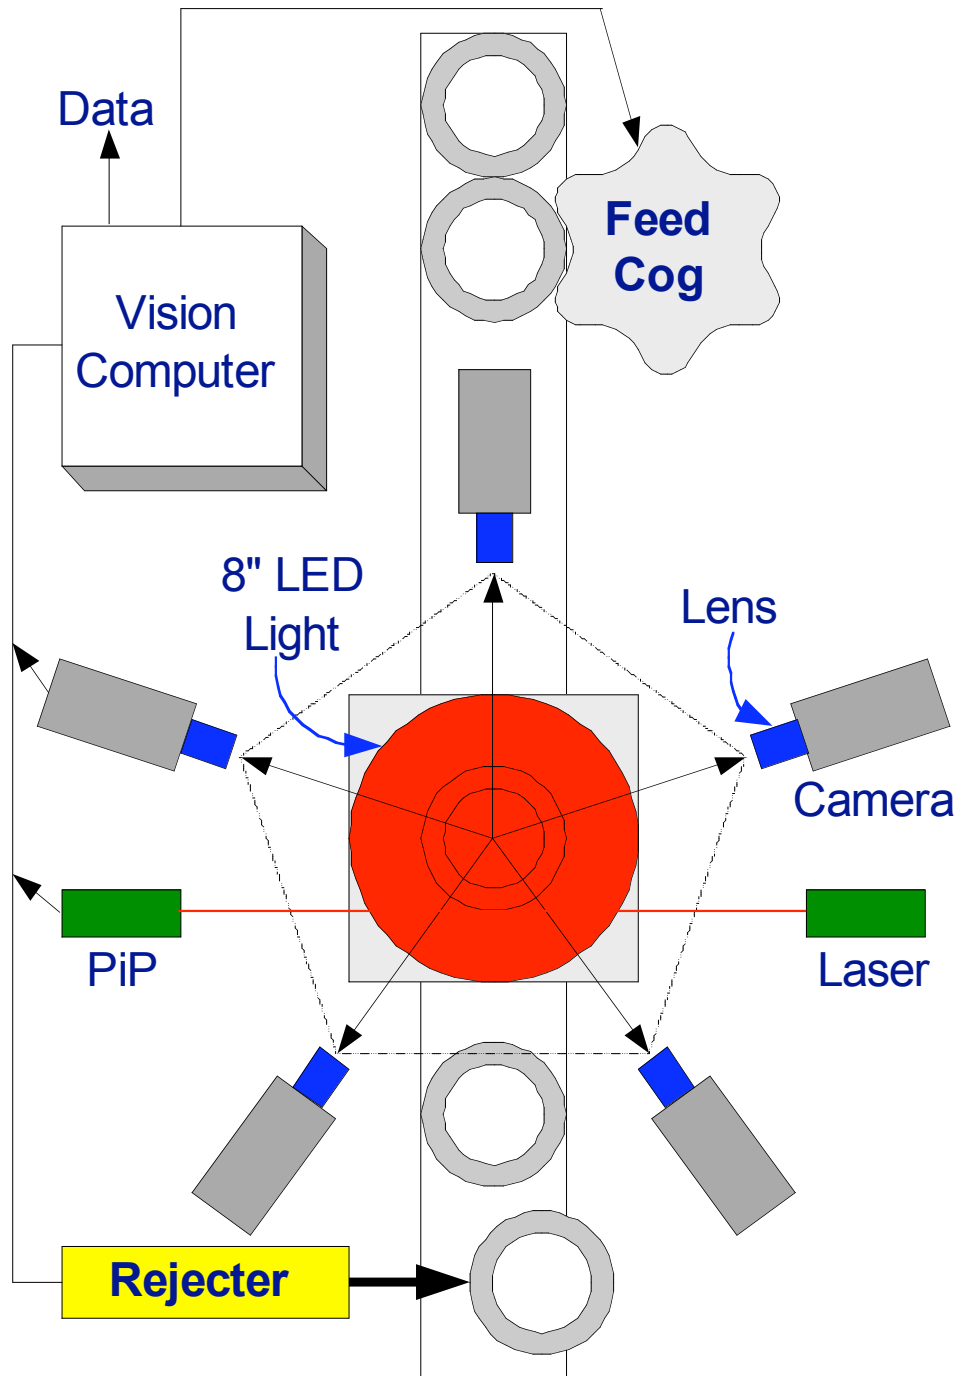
Schematic diagram of an AOI system, viewed from above. A feed cog (at top) releases a bearing. When the bearing interrupts the PiP beam, 5 cameras image the part. The vision computer signals a compressed air rejecter to remove defective parts.
